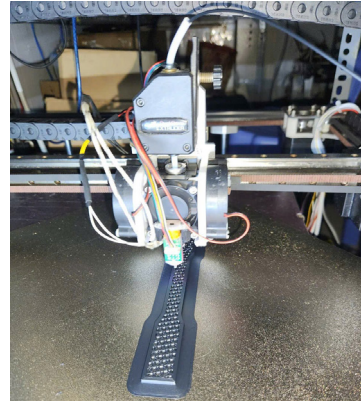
Klipper 3D printer firmware and the test sample is being printed
